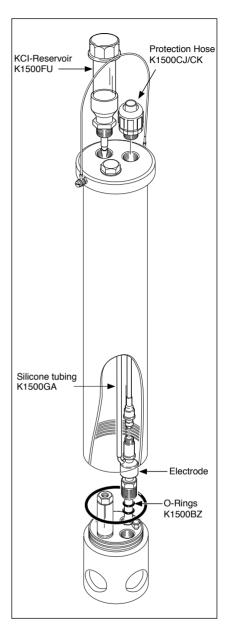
Mounting of refillable electrodes with a long glass shaft
